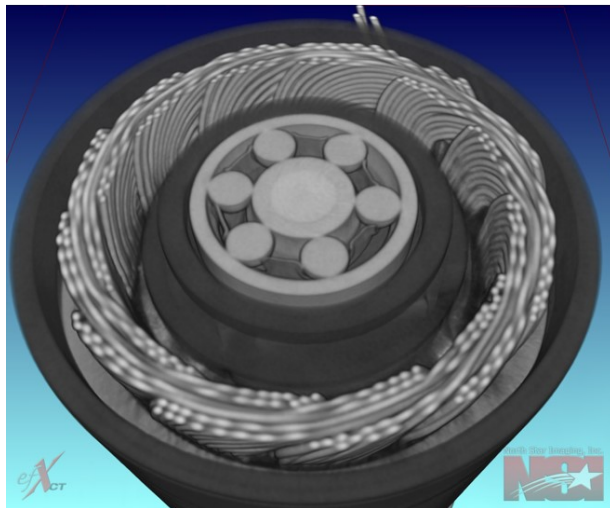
Front Motor Bearing Closest to the Gearbox Input
